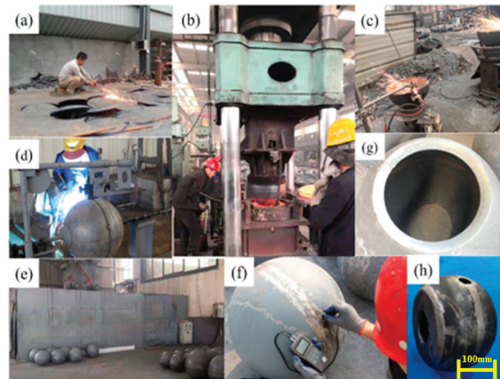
The fabrication process of the BDSSJ: (a) cutting, (b) forging and shaping, (c) hemispherical surface processing, (d) welding and shaping, (e) shot peening, (f) weld flaw detection, (g) drum surface welding, (h) processing, shaping, and treatment.
